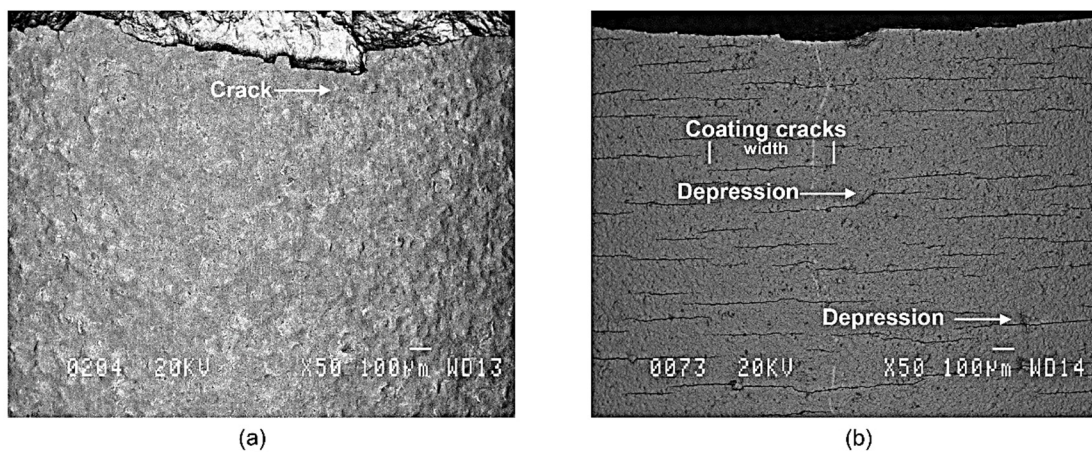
Typical side of the fracture surface, adjacent to the failure initiation point, for unexposed specimens: (a) uncoated, (b) coated. More fatigue cracks formed at the coating surface than for uncoated specimens. The specimen loading axis is oriented vertically.
